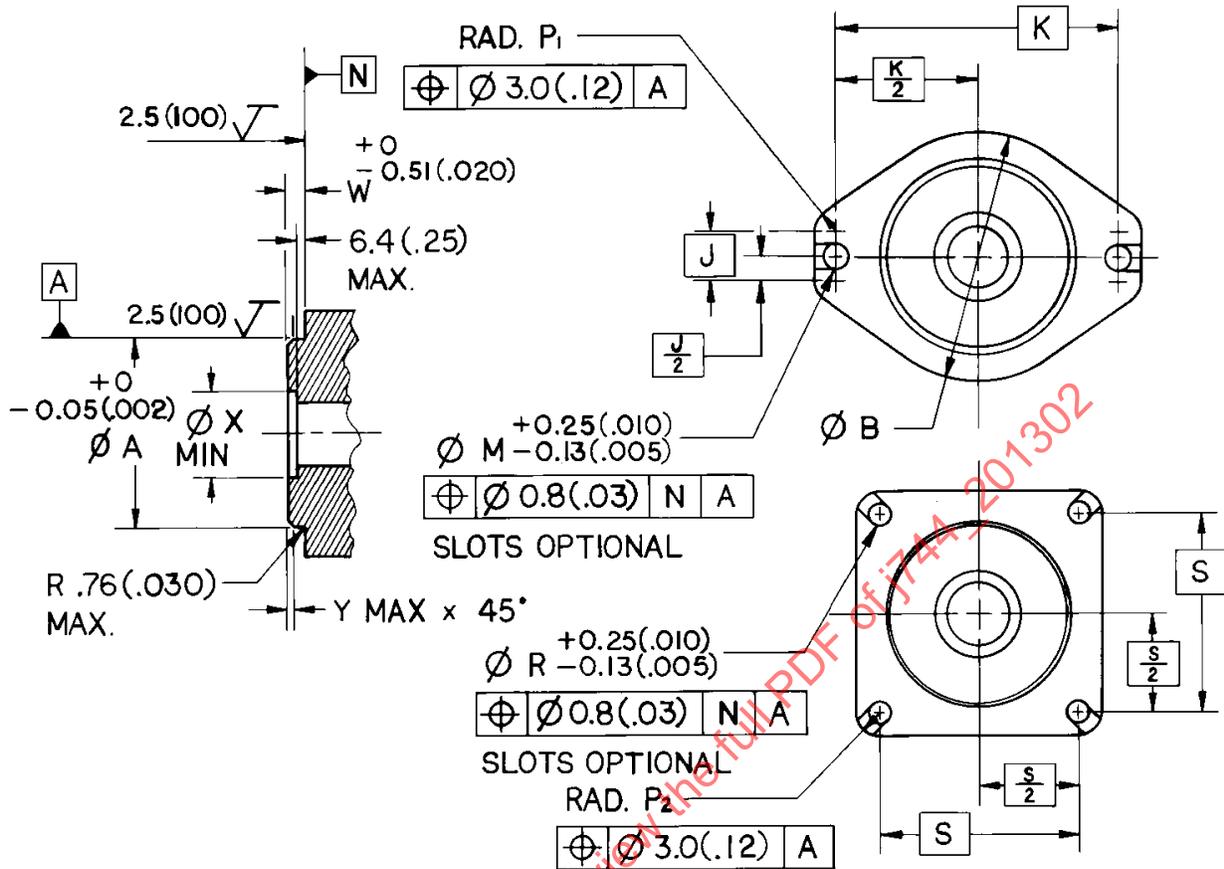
DIMENSIONS OF 2 AND 4 BOLT PUMP AND MOTOR MOUNTING FLANGES
